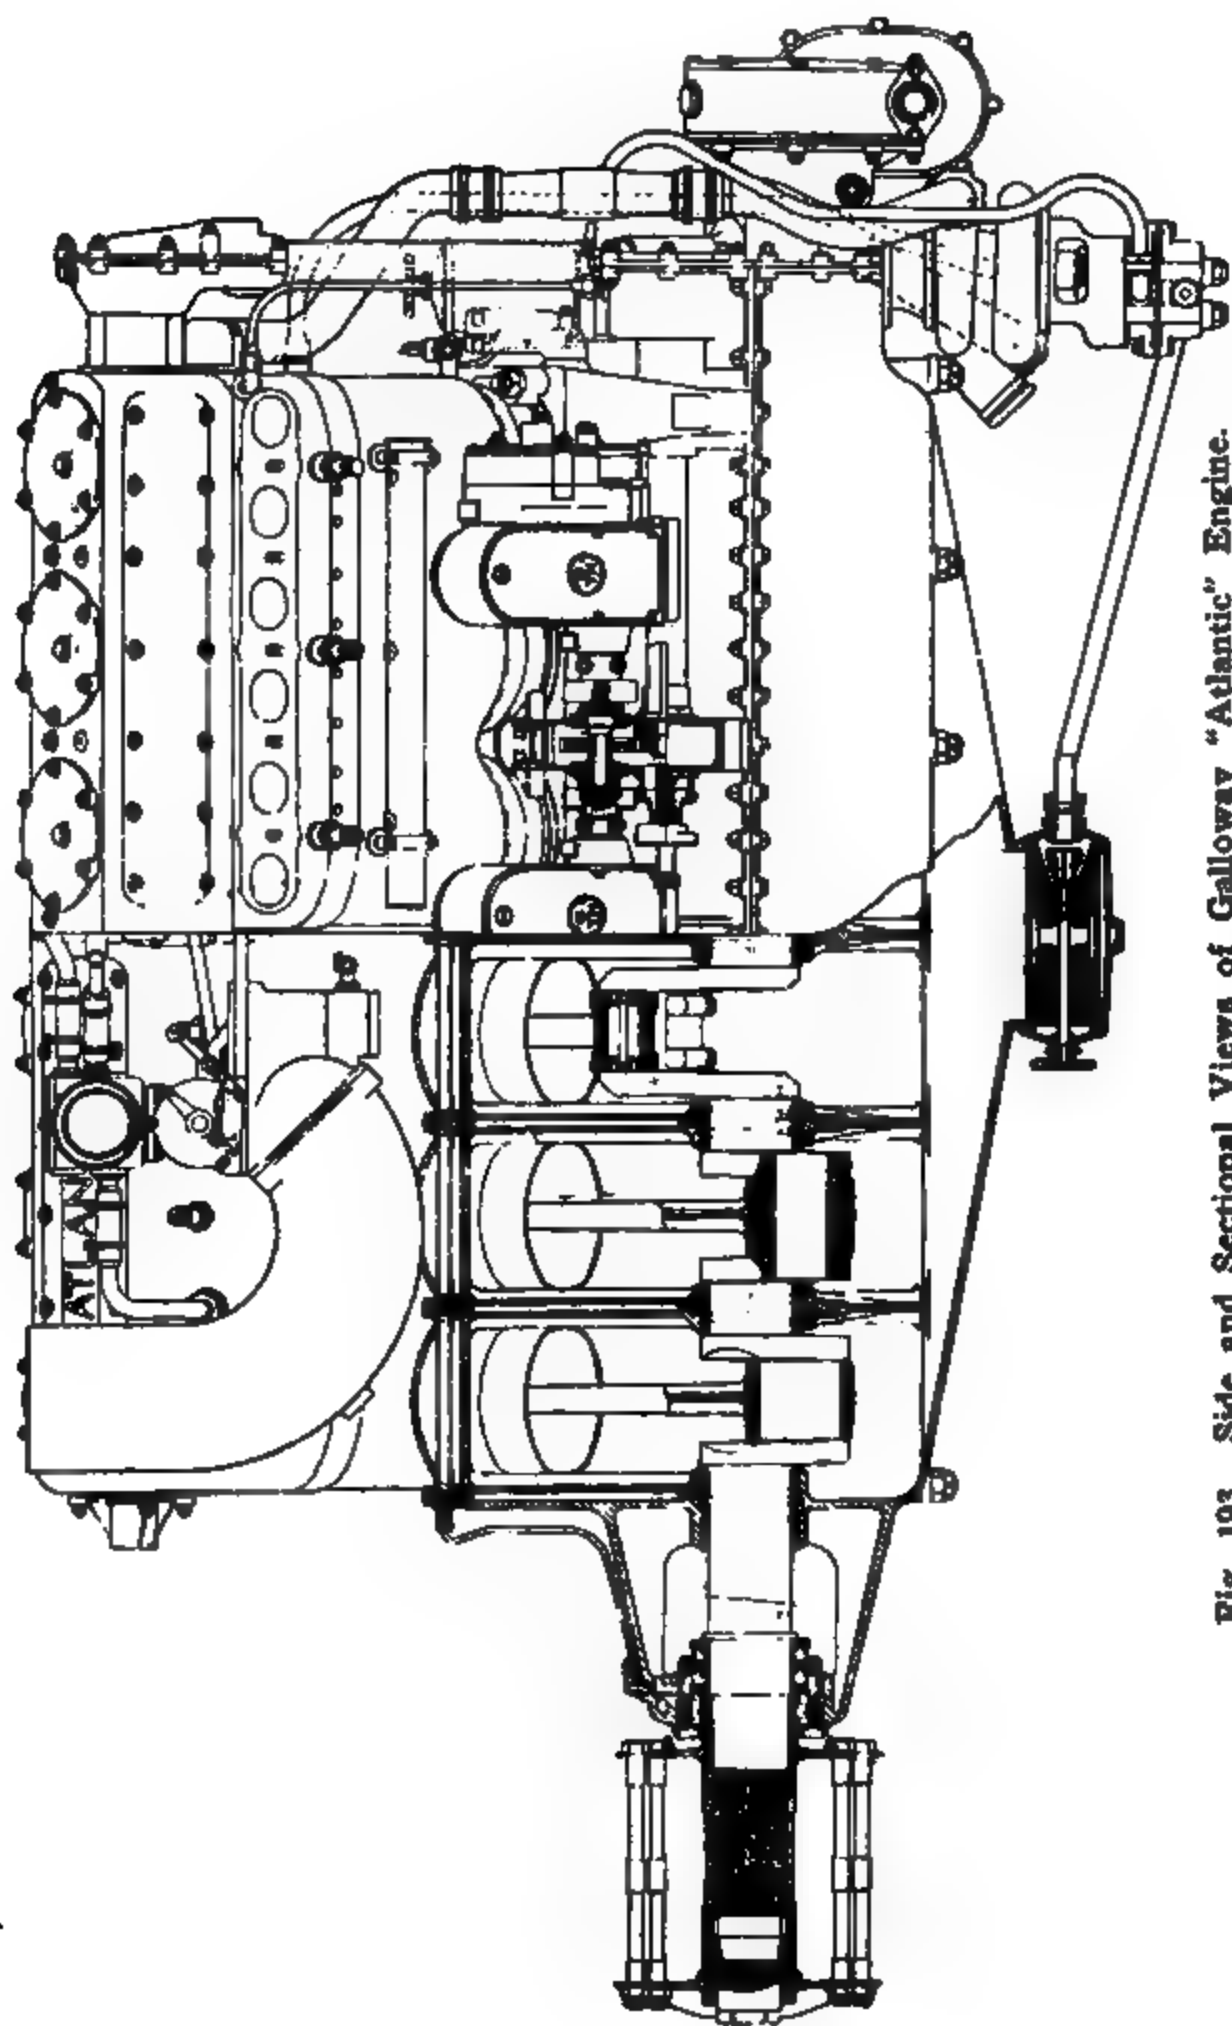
Side and Sectional Views of Galloway "Atlantic" Engine.
